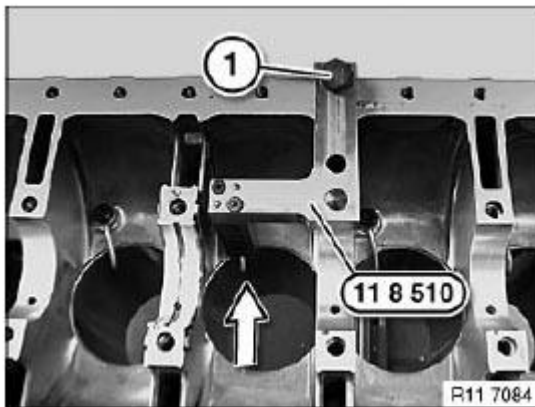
Attaching Special Tool (11 8 510) To Bolt Connection On Main Bearing
